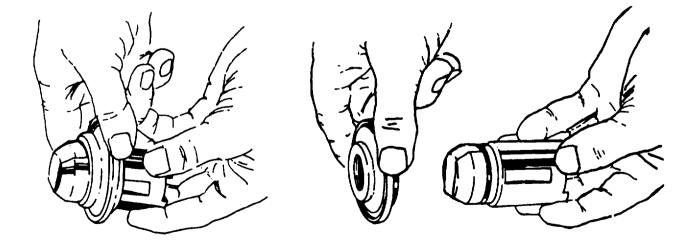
Installing Seal on Non-Adjusting Plunger
